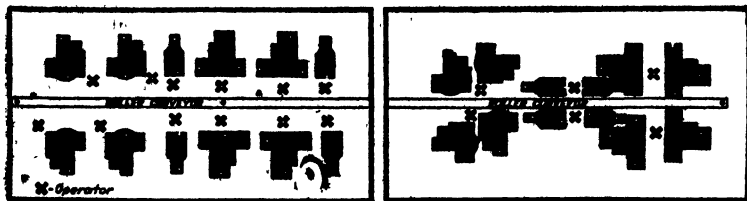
Old and New Layout Showing How Machines Can Be Rearranged So One Man Can Operate More Than One Machine
